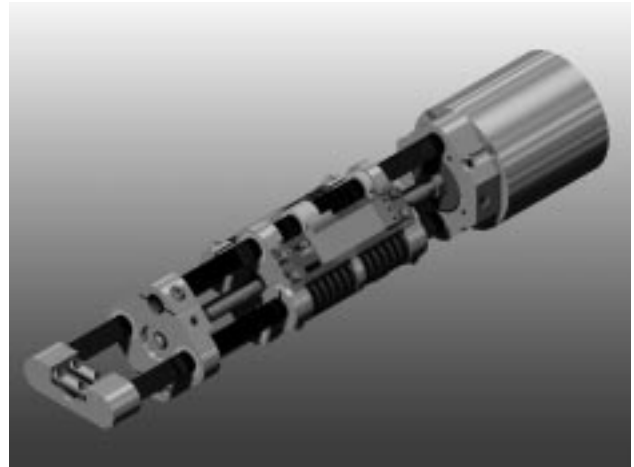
The prototype actuator has a brushless DC motor rigidly connected to a ballscrew which drives the linear motion. The ballscrew nut is coupled to the output through four die compression springs. The spring compression is measured with a linear potentiometer. The actuator can output over 1350 N and move at 25 cm/second.
